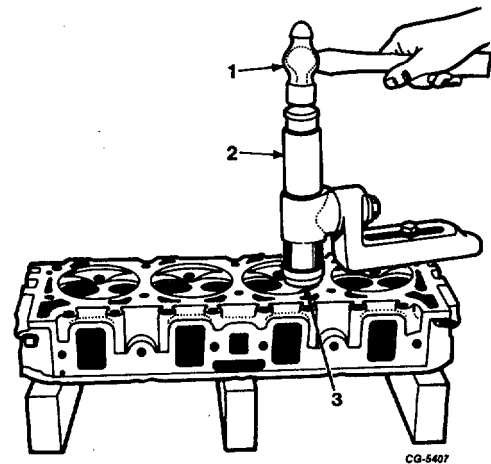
Using Insert Installer from Counterbore Tool Set SE-1797 for Installing Inserts in Cylinder Head
